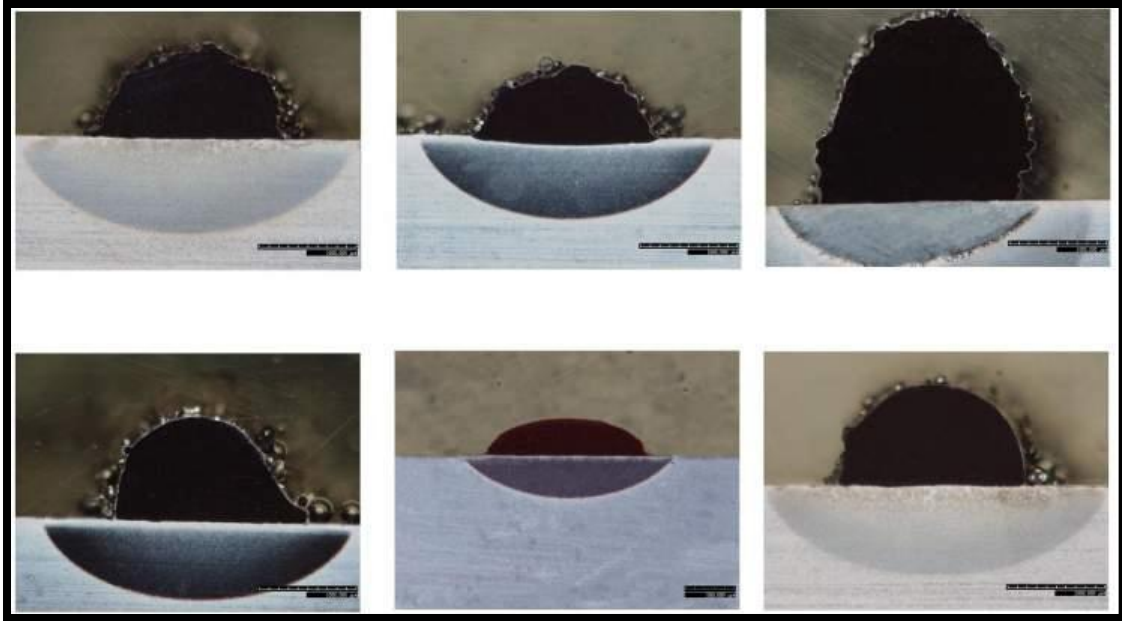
Macrographs of the bead geometries deposited during the experiments.
